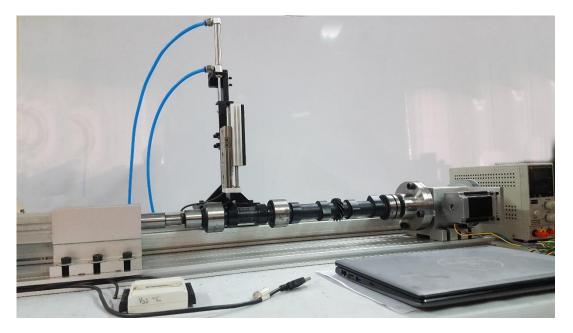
Camshaft inspection machine (manufactured and assembled)
